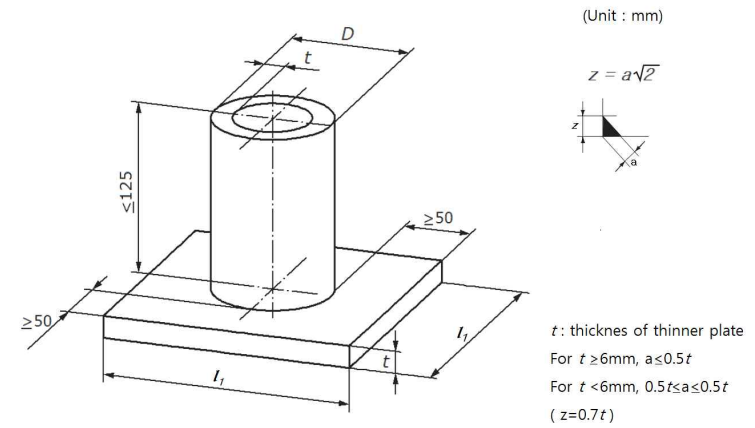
Dimensions and types of test assembly for pipe fillet welds
